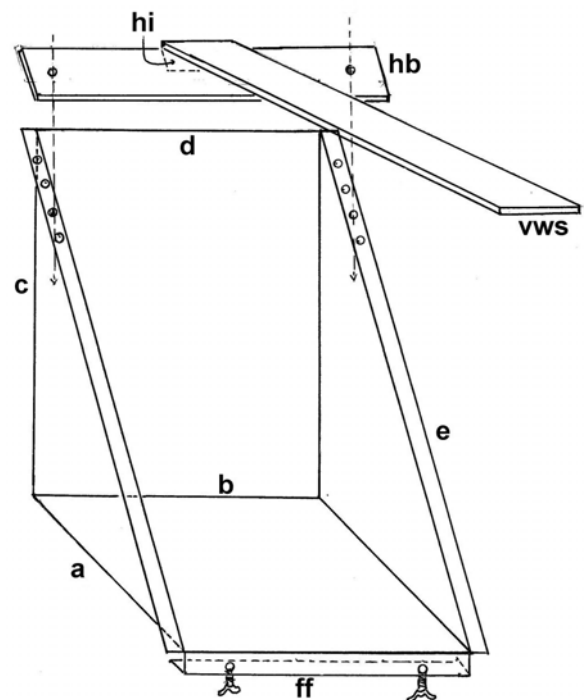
Principal parts of restraint device. a-d = body of frame; e = angle bars with holes drilled for horizontal bar; hb = horizontal bar; vws = vertical wooden support for marmoset; hi = hinge with removable pin connecting vertical support to horizontal bar; ff = front fitting over lab bench. Not to scale.
